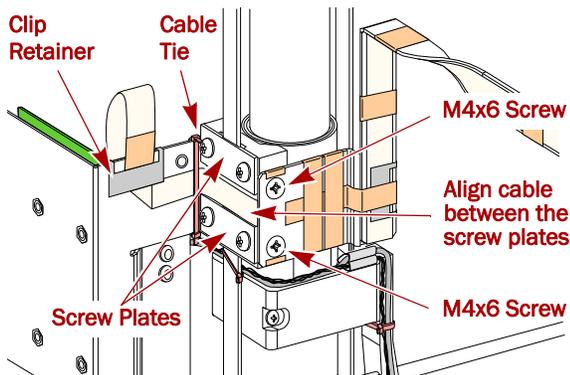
Attach Cable Assembly to Z-Axis Bracket
